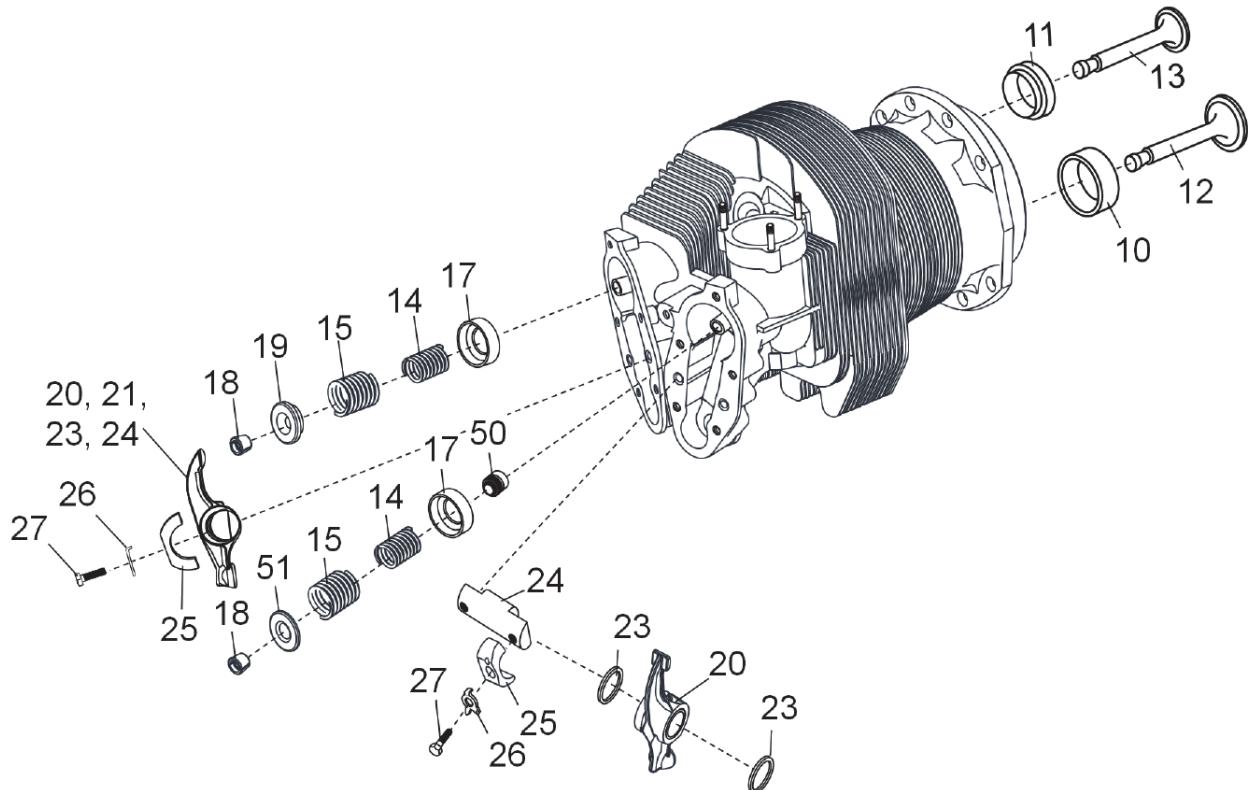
Crossflow Cylinder Assembly G N P R
